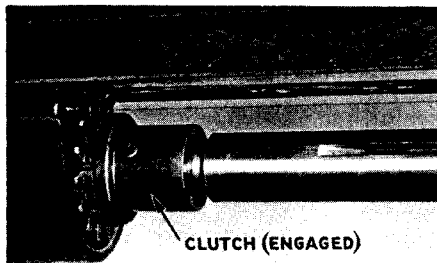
Below — Clutch on table feed shaft must be disengaged before power drive to Rotary Attachment is engaged.
